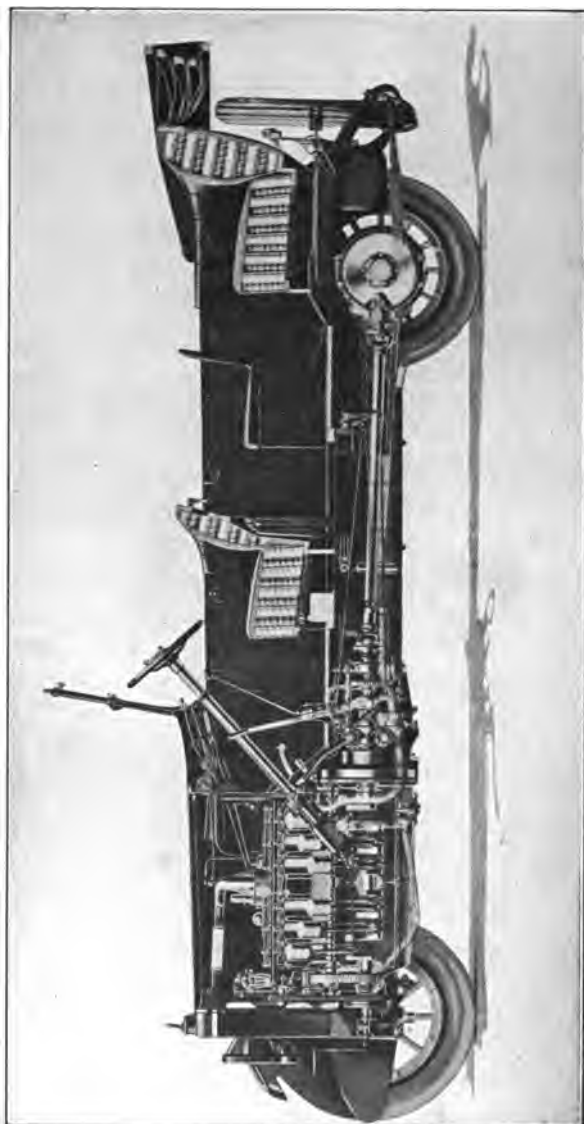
SECTIONAL VIEW OF AN AUTOMOBILE.
